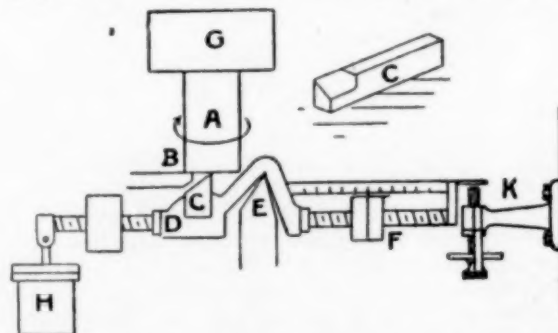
DIAGRAM OF TOOL-STEEL TESTING MACHINE.
